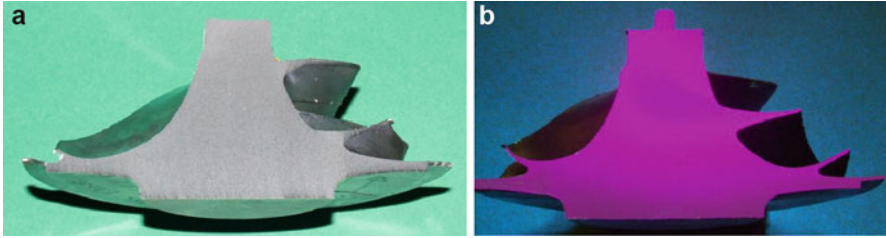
Sections through impellers showing lack of porosity [5]; (a) Machined surface, (b) Machined and penetrant tested (viewed under ultraviolet light)
